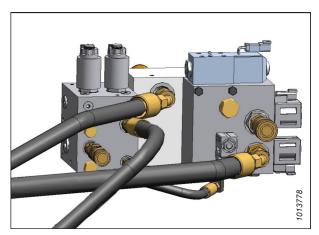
M150/M155/M155*E4* with Reverser Valve
